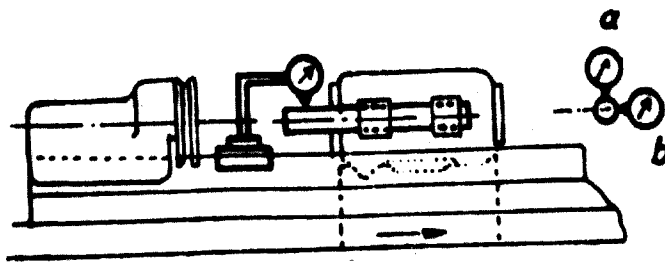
Parallelism between the Internal Grinding Spindle and the Table Movement
